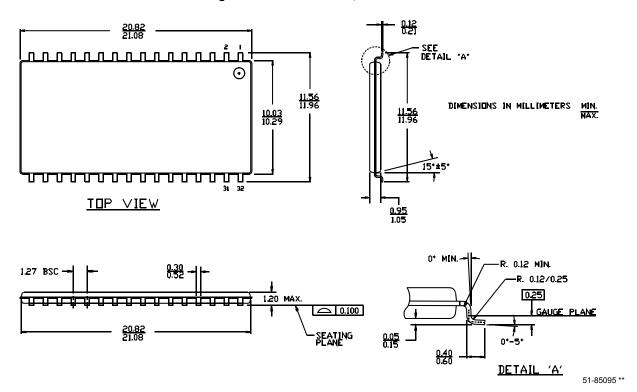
32-Pin (450-mil) Molded SOIC, 51-85081
